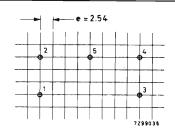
Hole pattern of the printedwiring board (viewed on circuit side)
